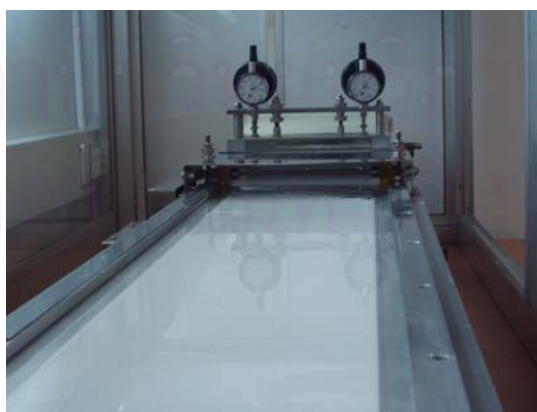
Tape casting machine with the electrolyte slurry casting
